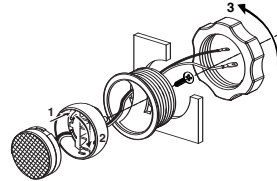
Mounting the 60.7cs woofer in a standard speaker location.
